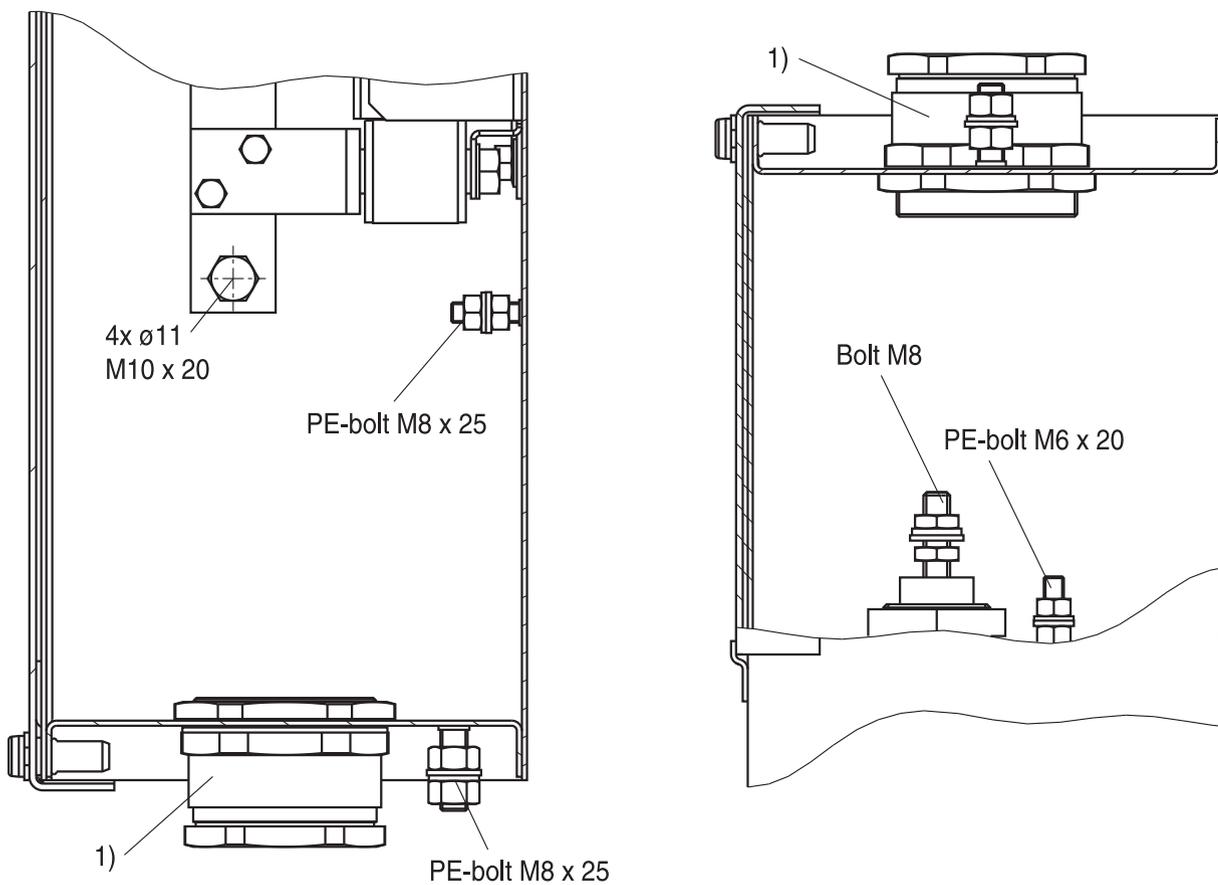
B84299C1101E303 (4 × 100 A) – details of connection
